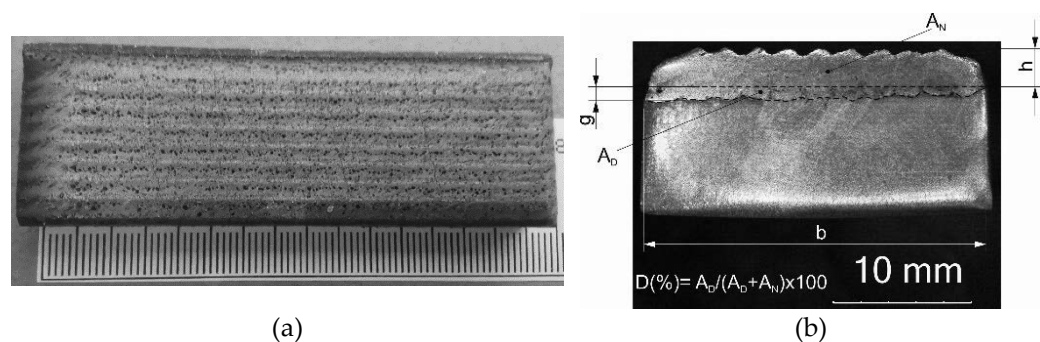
LDMD coating with composite powder: (a) a view from the face of the padding welds, (b) a cross section of the coating
